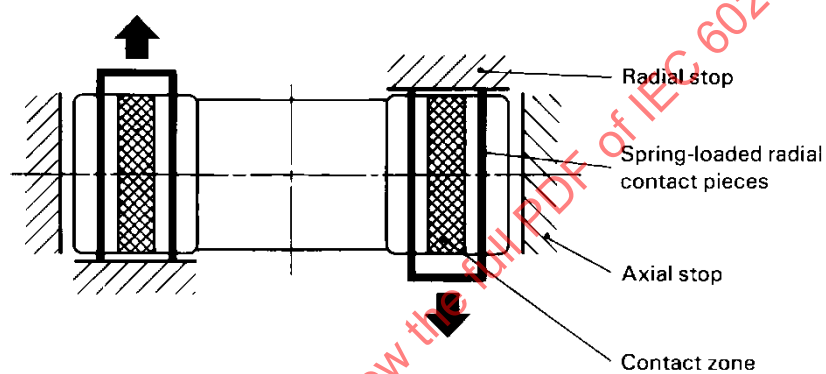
Fuse-links with cylindrical contact caps with striker –
